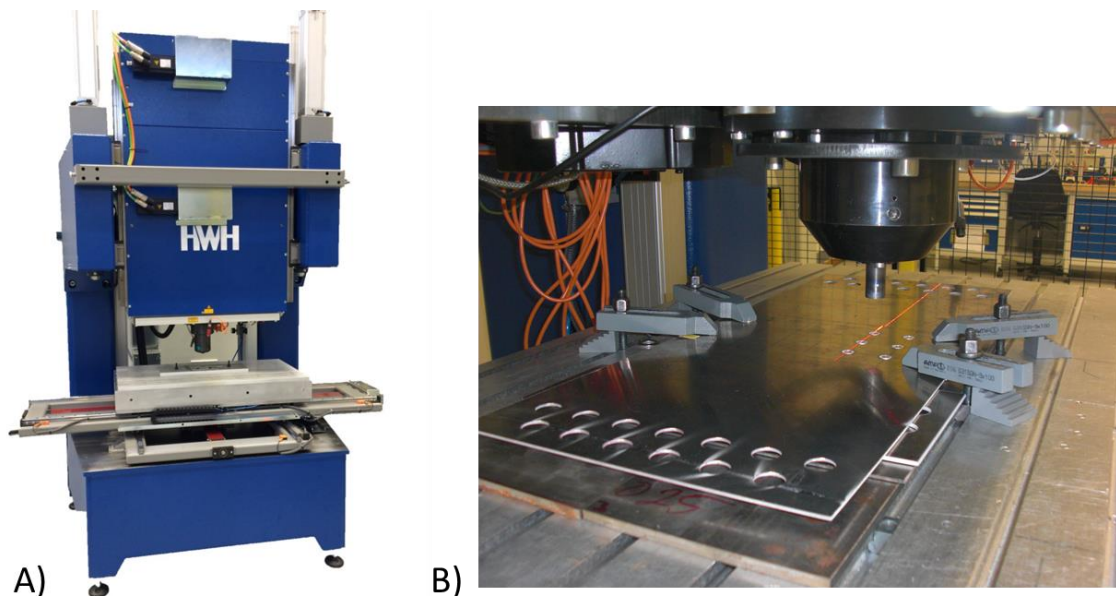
Refill FSSW RPS200 experimental welding machine.
